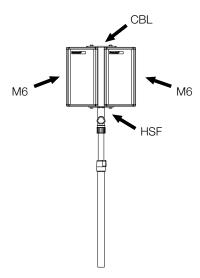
Assembly CBL to M6 loudspeaker
